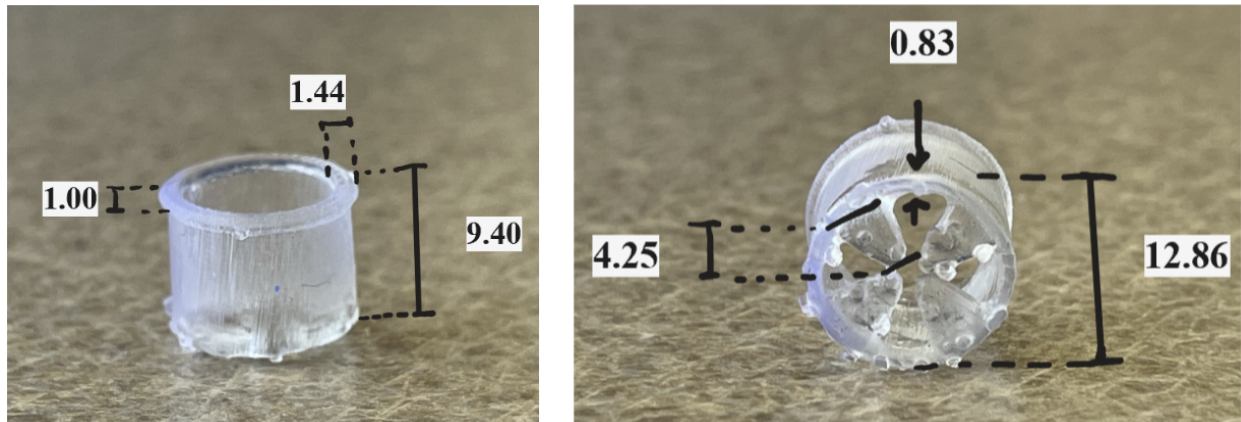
(left): Silicone section front view (dimensions in millimeters)
